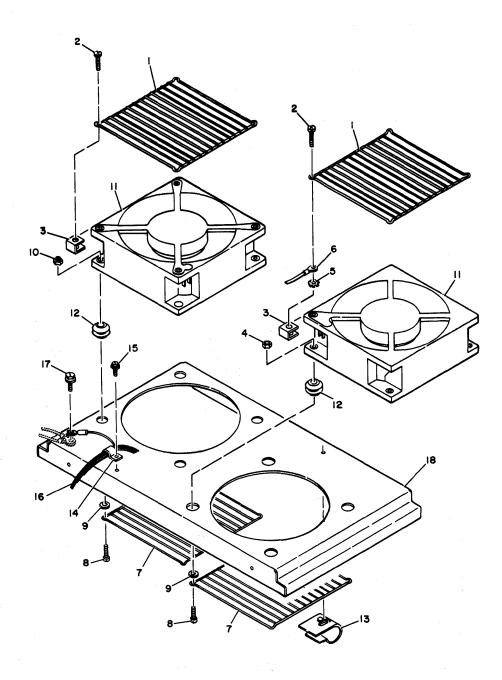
A. PLENUM ASSEMBLY — NEW STYLE
